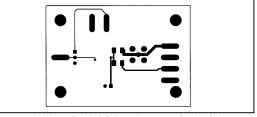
MAX840 EV Kit PC Board Layout—Solder Side (not shown to scale)
